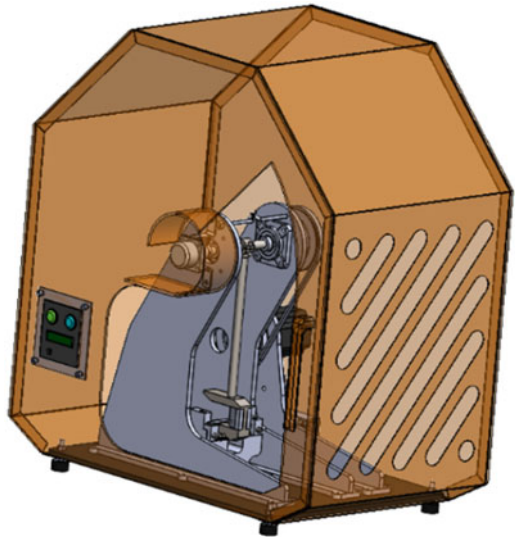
Geometry of the Charpy testing machine. (Source: Autor)
